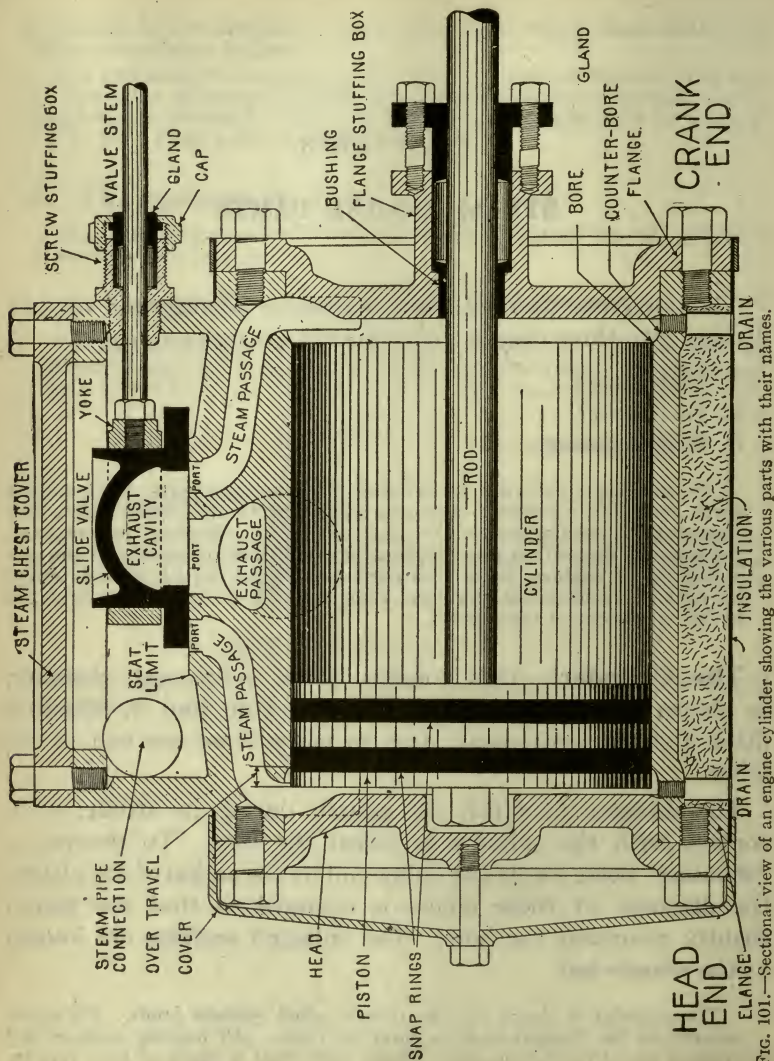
Sectional view of an engine cylinder showing the various parts with their names.
